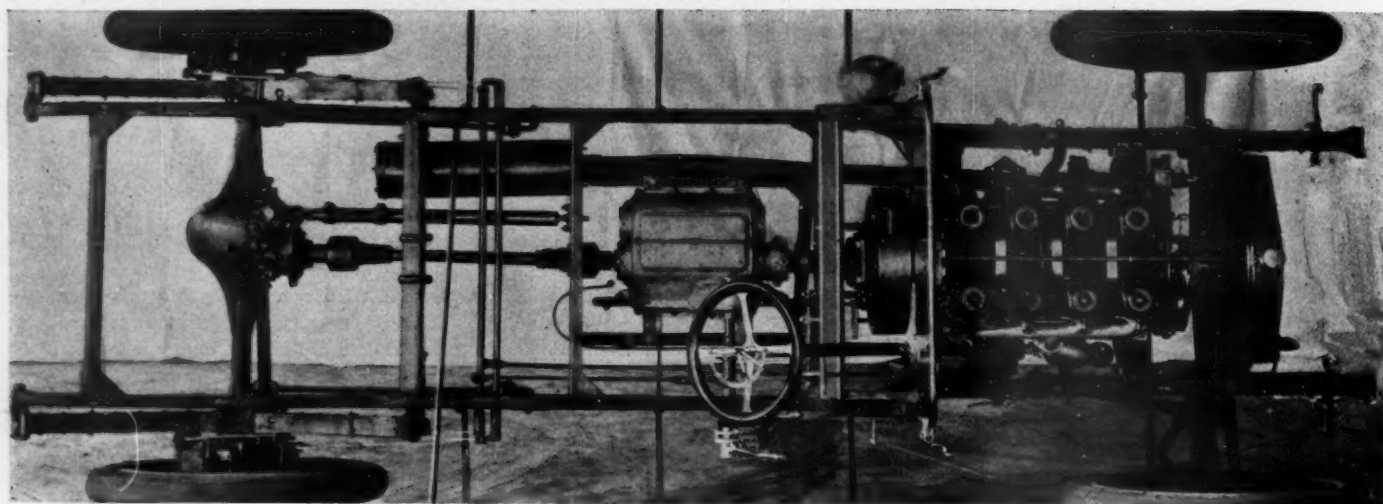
CHASSIS OF PULLMAN CAR FOR 1909 WITH CONTINUOUS WATERJACKETS
